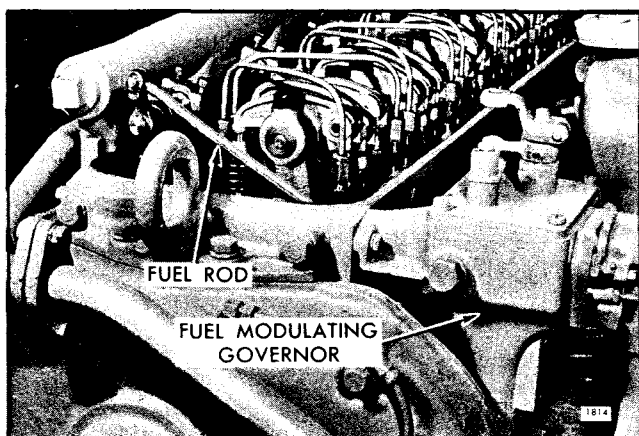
Standard Fuel Rod Used with Fuel Modulating Governor
